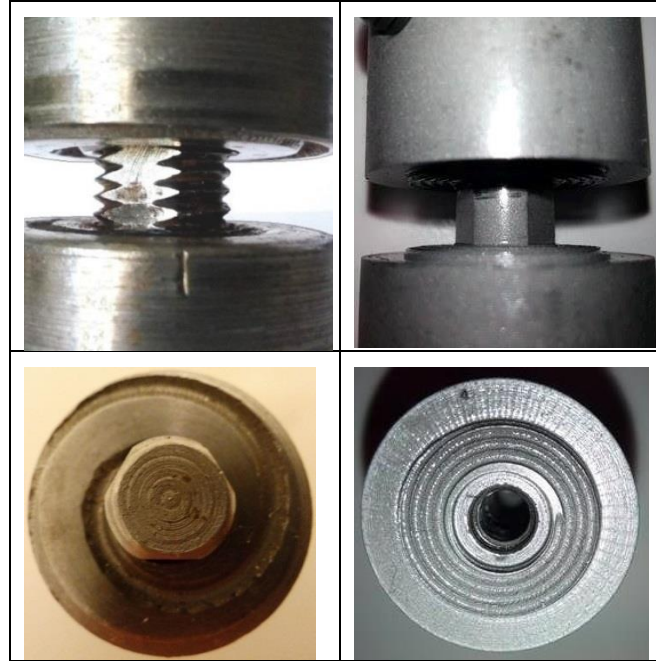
4. The starting tool features design for the Bobbin tools, employed for the first Al alloy, A6082-T6 welding trials (by A TAMADON).
